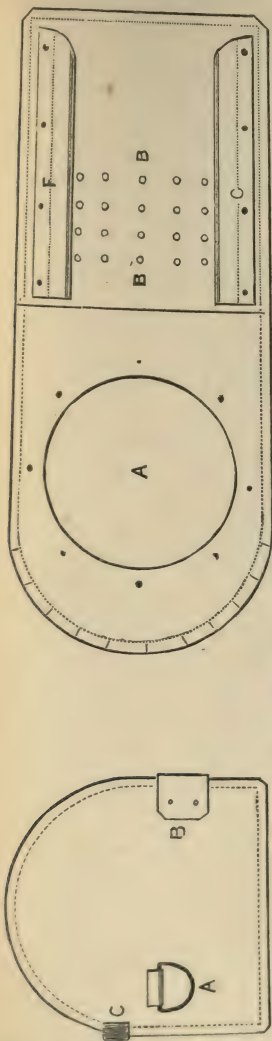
Piece for Door (c Piece). Scale, $\frac{1}{4}$ in. to 1 in.
